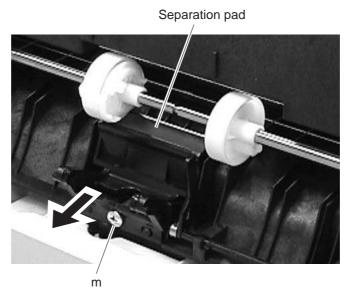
Paper Pick-up Roller (multi-purpose) 9
